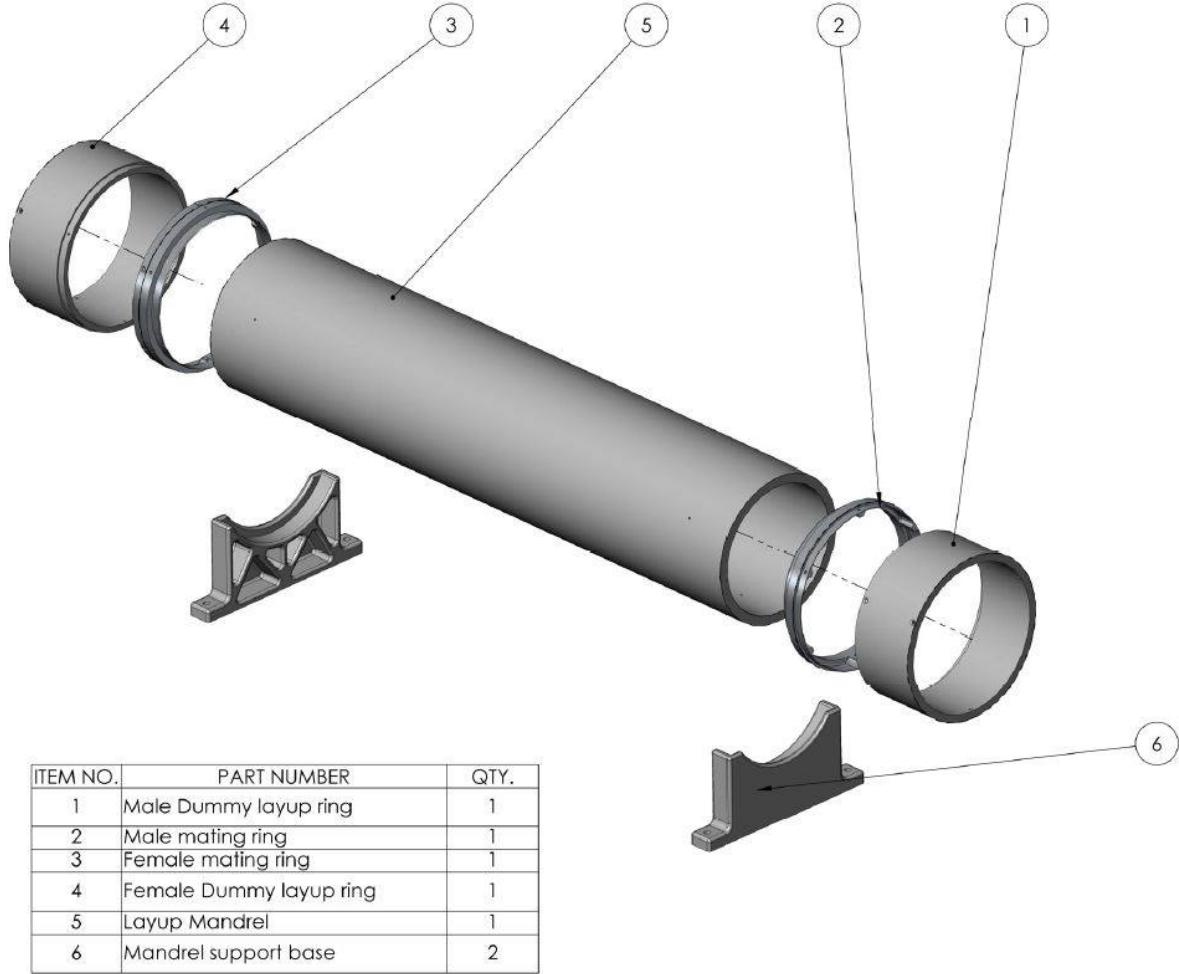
Exploded view of layup assembly. Two brackets are used to hold the layup mandrel. Two coupling rings are fixture to the mandrel using two corresponding dummy rings.
